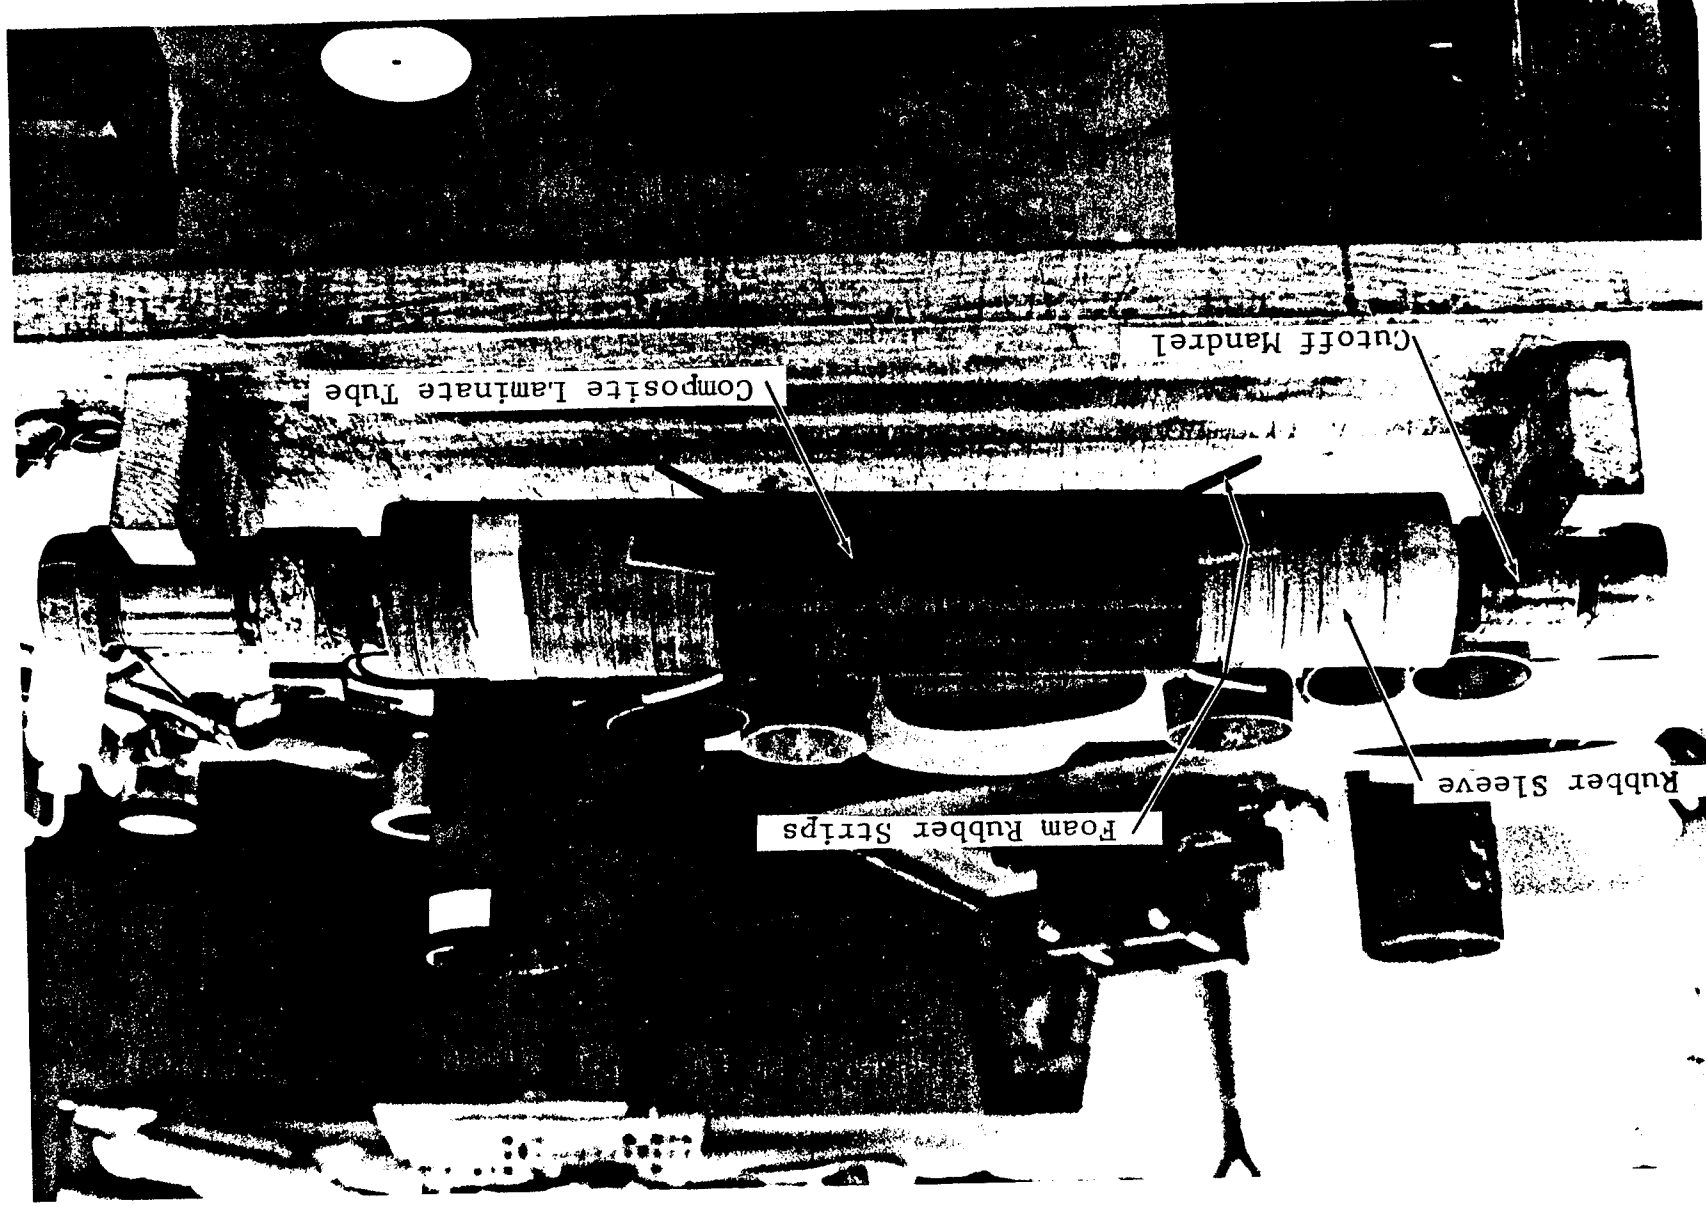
Composite laminate tube mounted on a rubber-sleeve-covered cutoff mandrel in preparation for cutting ring specimens.
